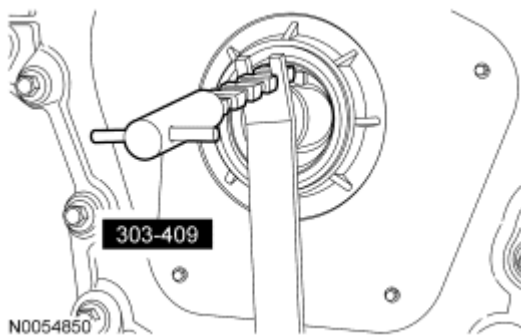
Removing Crankshaft Front Seal Using Special Tool (303-409)
